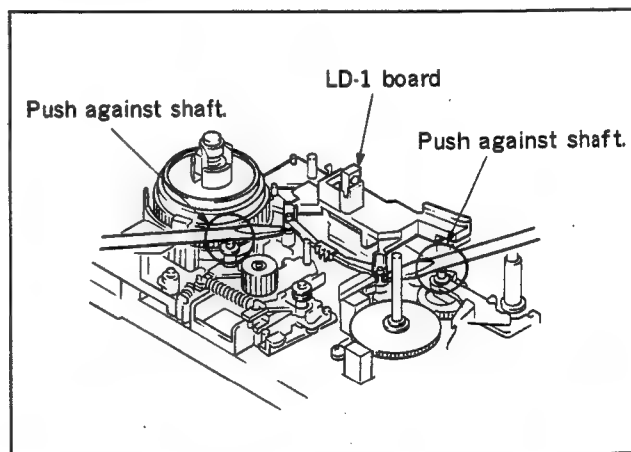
Detailed drawing of removal of LD-1 board ass'y
